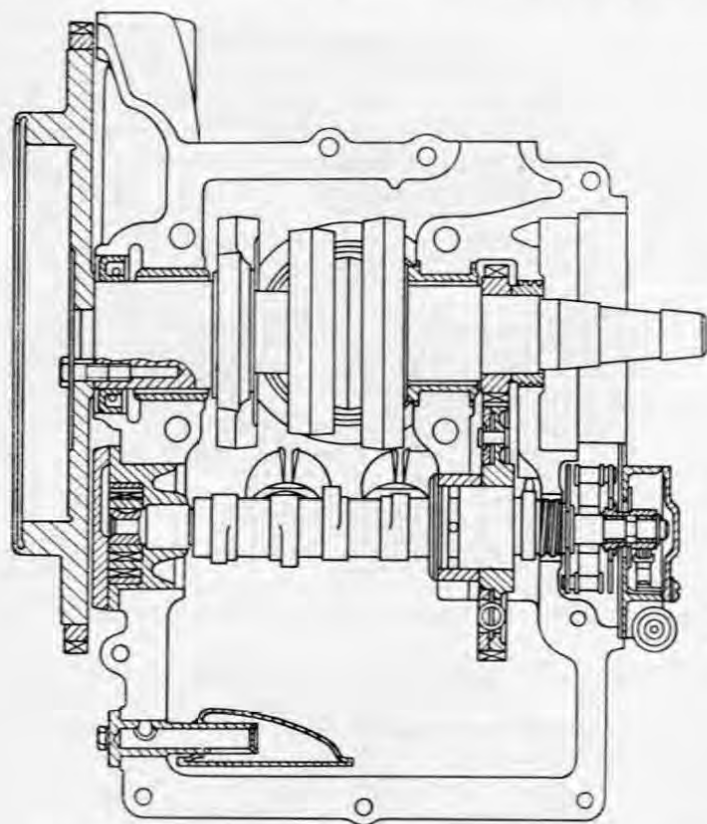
Longitudinal section of the two-cylinder Citroen engine.
